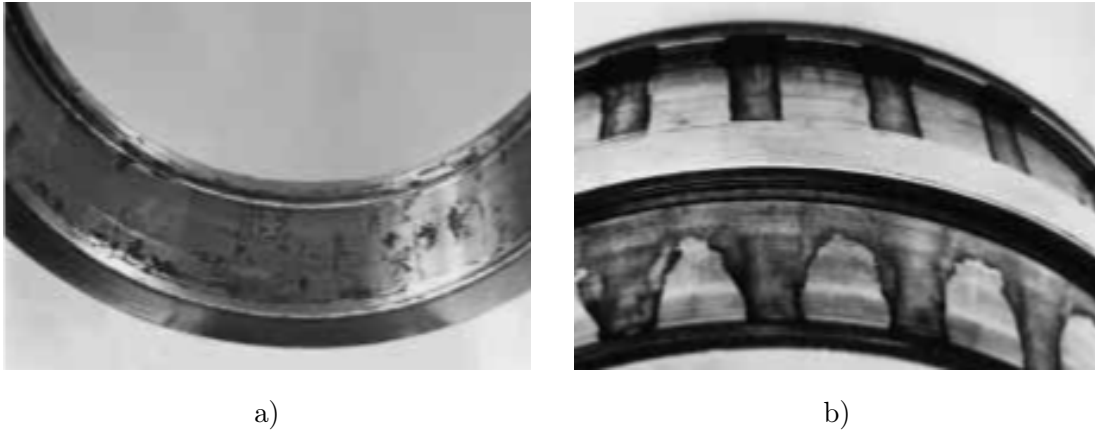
Corrosion defect on a) outer ring of cylindrical roller bearing and b) inner ring of a ball bearing [45].
